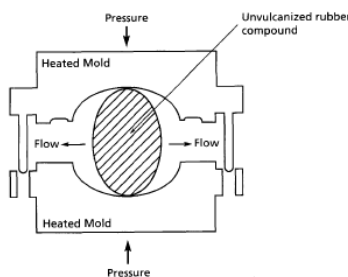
A loaded mold closing (courtesy of the Holz Rubber Company)
